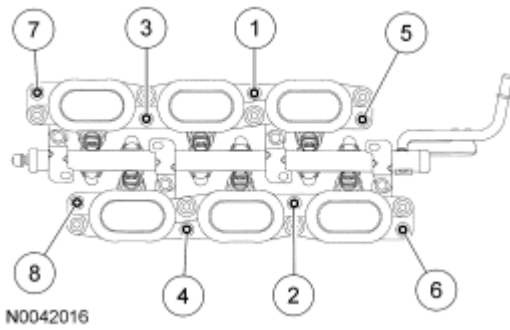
Identifying Tightening Sequence Of Lower Intake Manifold Bolts
